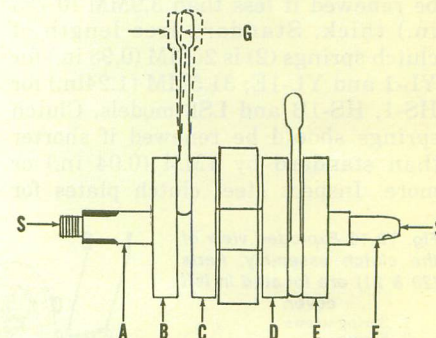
Refer to text for checking crankshaft for correct assembly or wear.
